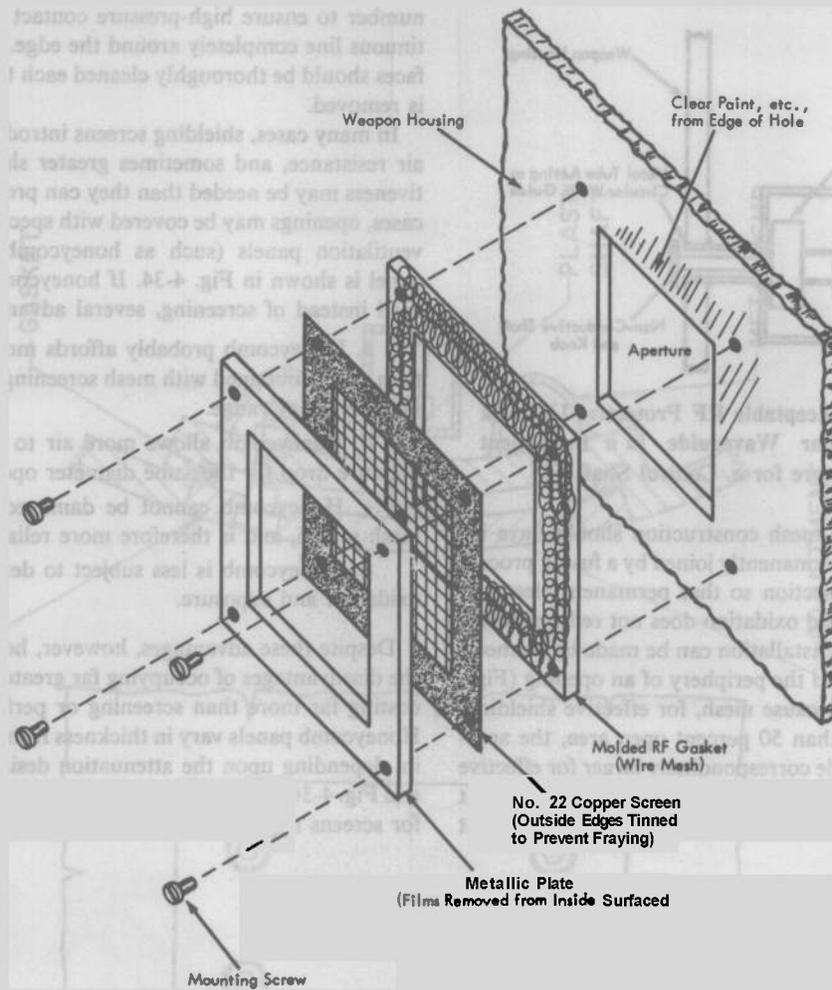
Method of Mounting Wire Screen Over a Large Aperture
